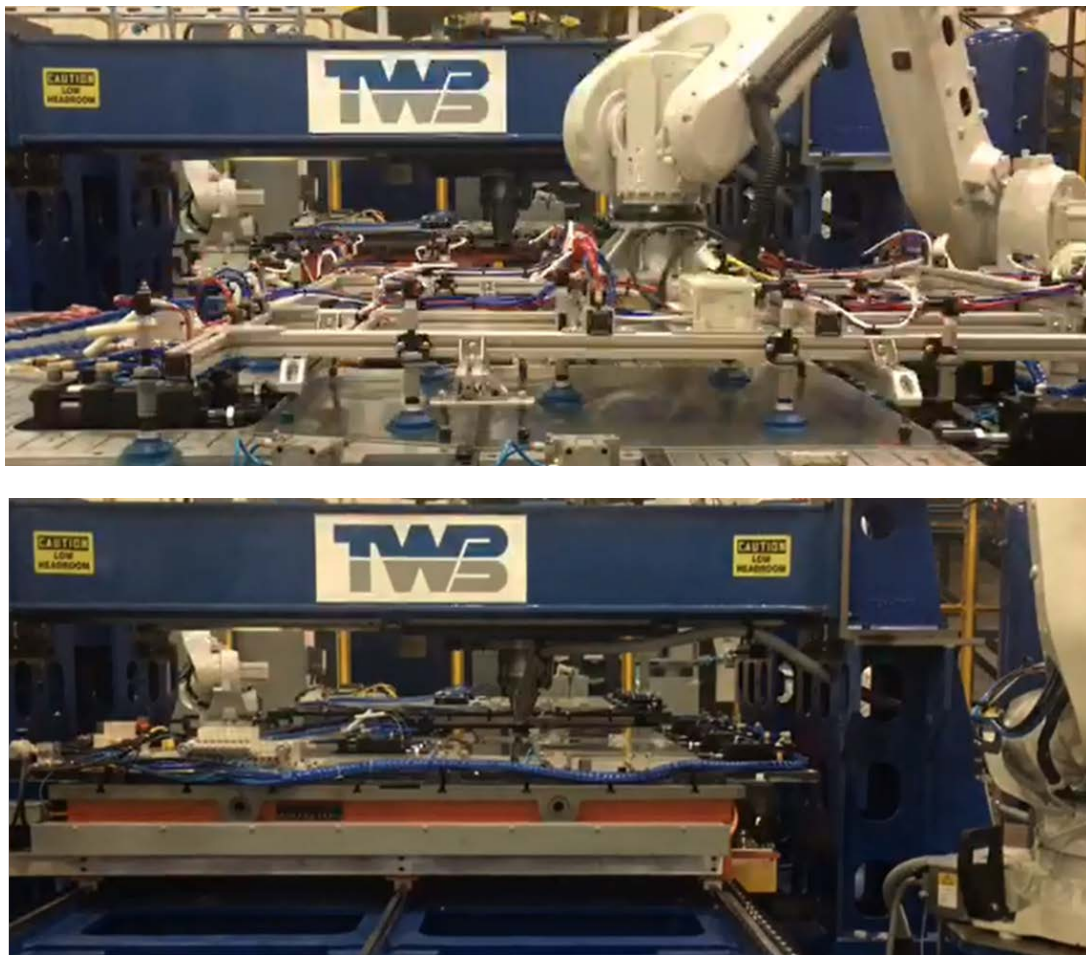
D.2. Assembly line recently added at TWB Company showing six axis robotic material feeder and FSW gantry head ready to make a welding pass. The assembly line can make 95 blanks/hour including shearing, loading, welding, unloading, defect scanning, and stacking of blanks. Source: TWB Company.
